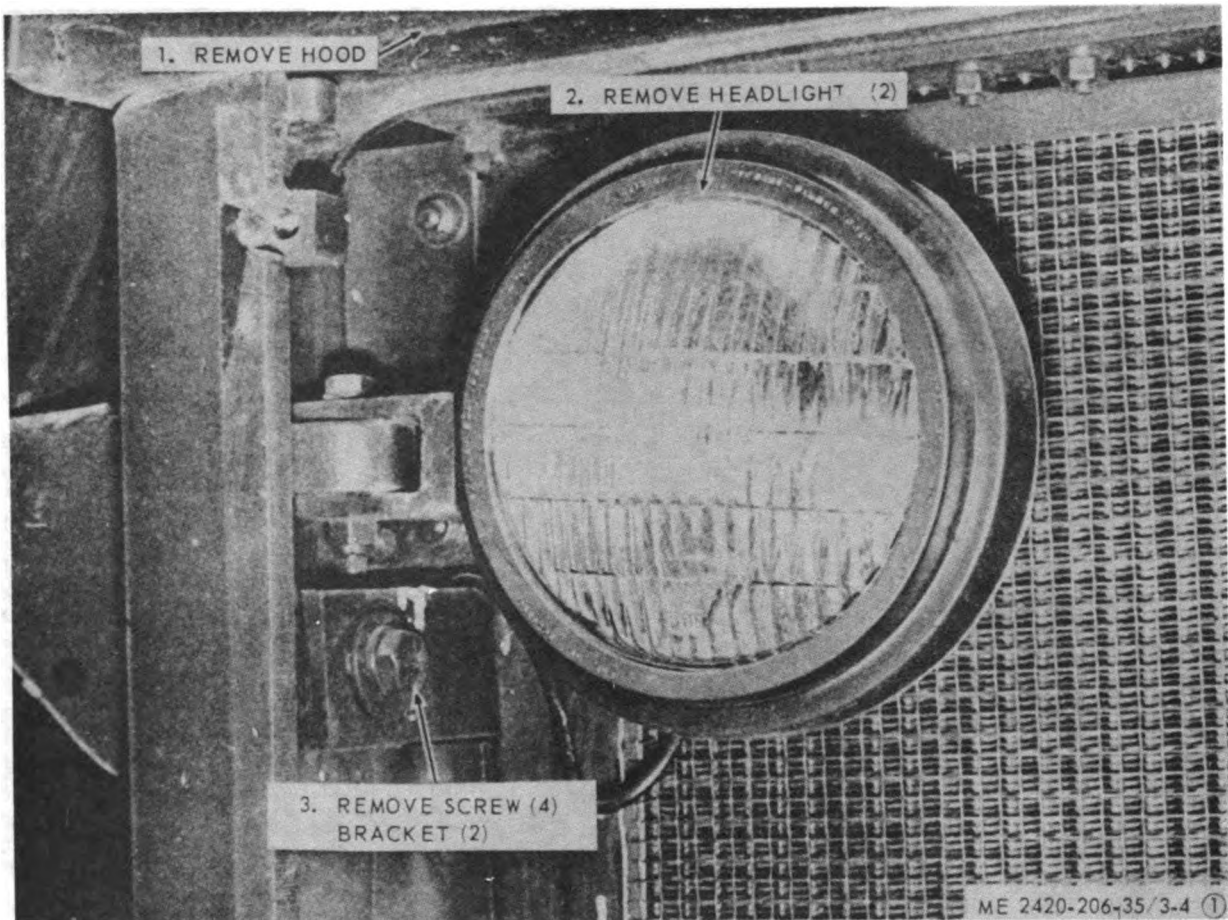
Radiator, removal and installation (sheet 1 of 3).
